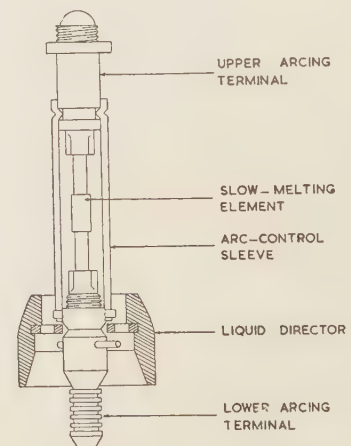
Cross-section of slow-melting element for liquid-type h.v. fuse.
